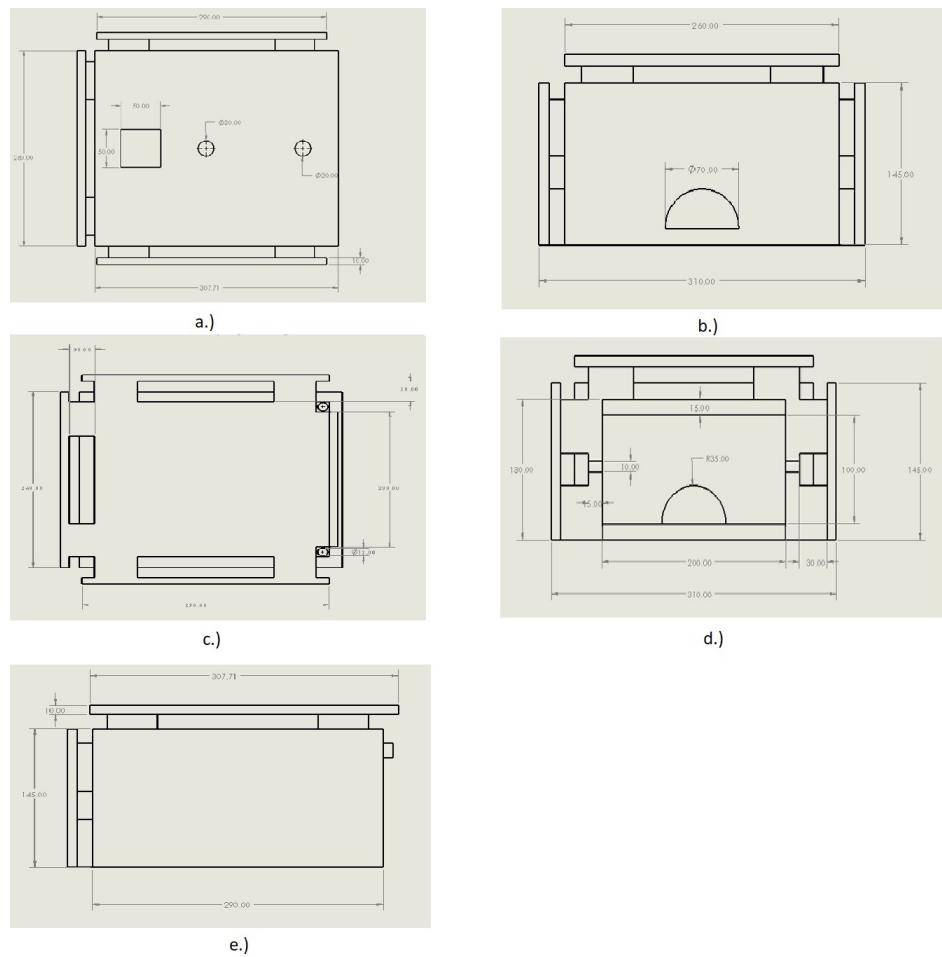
Drawings of final Design of the enclosure a.)Top view b.)Front view c.)Bottom view d.)Back view e.)Side view
